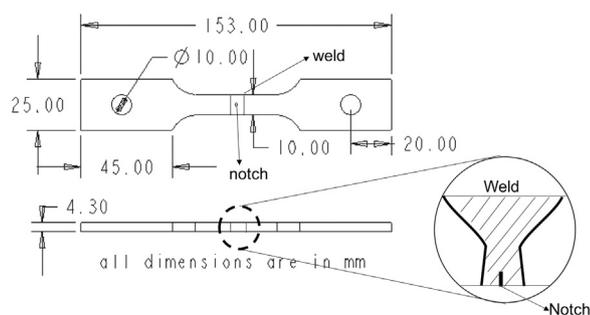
Geometry of surface flaw type specimen used for fatigue testing.
